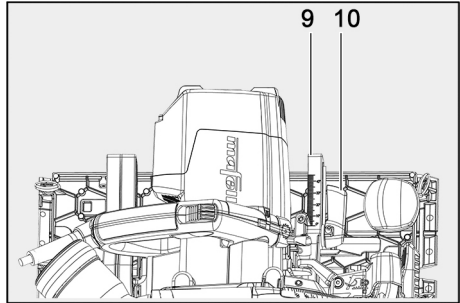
Setting the milling cutter for inclination and birthmouth cuts
